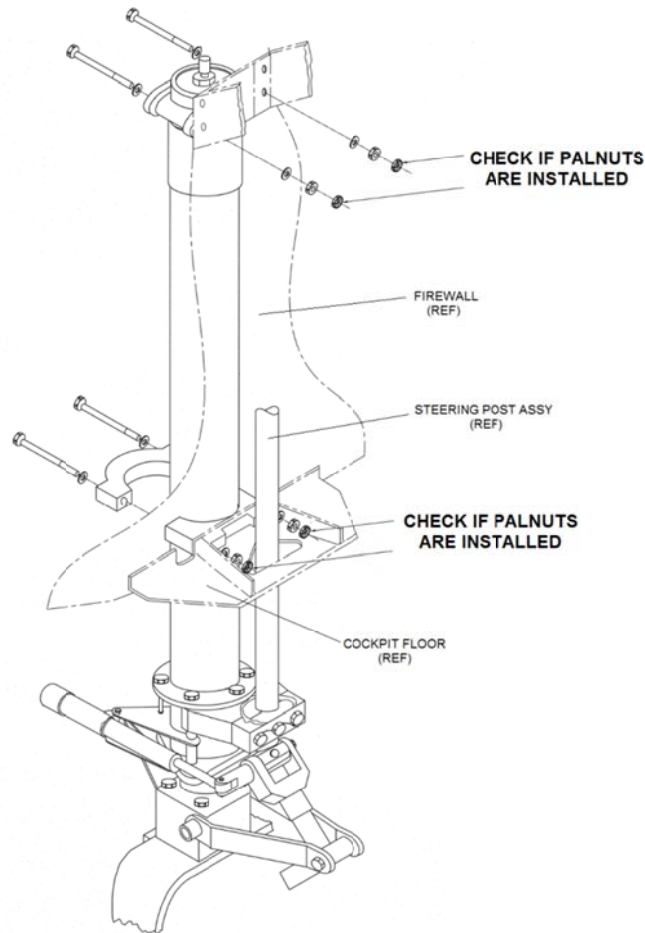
NOSE LANDING GEAR - INSPECTION
